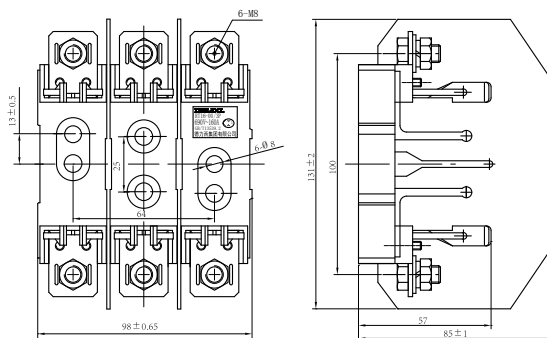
Outline and installation dimensions of the base of RT16 knife contact fuse
